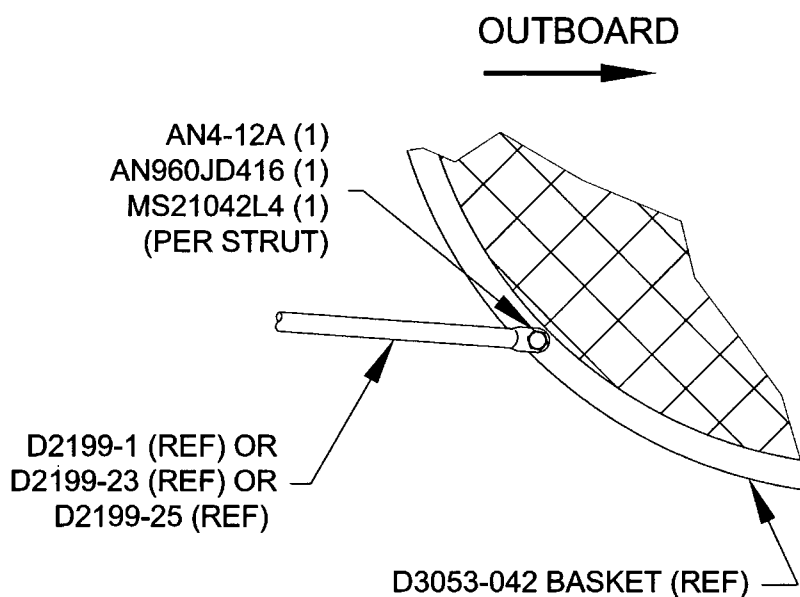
Section C-C Looking Fwd at STA 155.06
